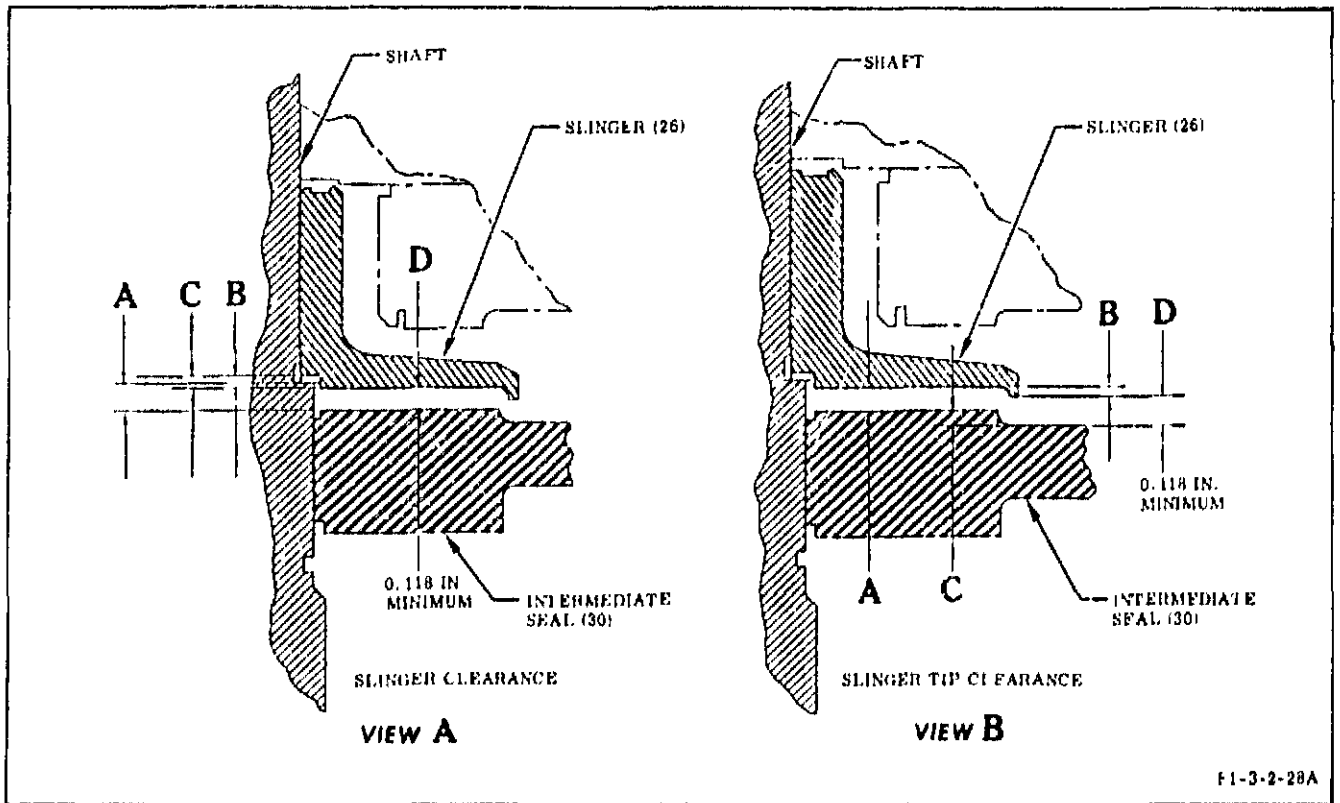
Determining Oxidizer Slinger-to-Intermediate Seal Clearance
